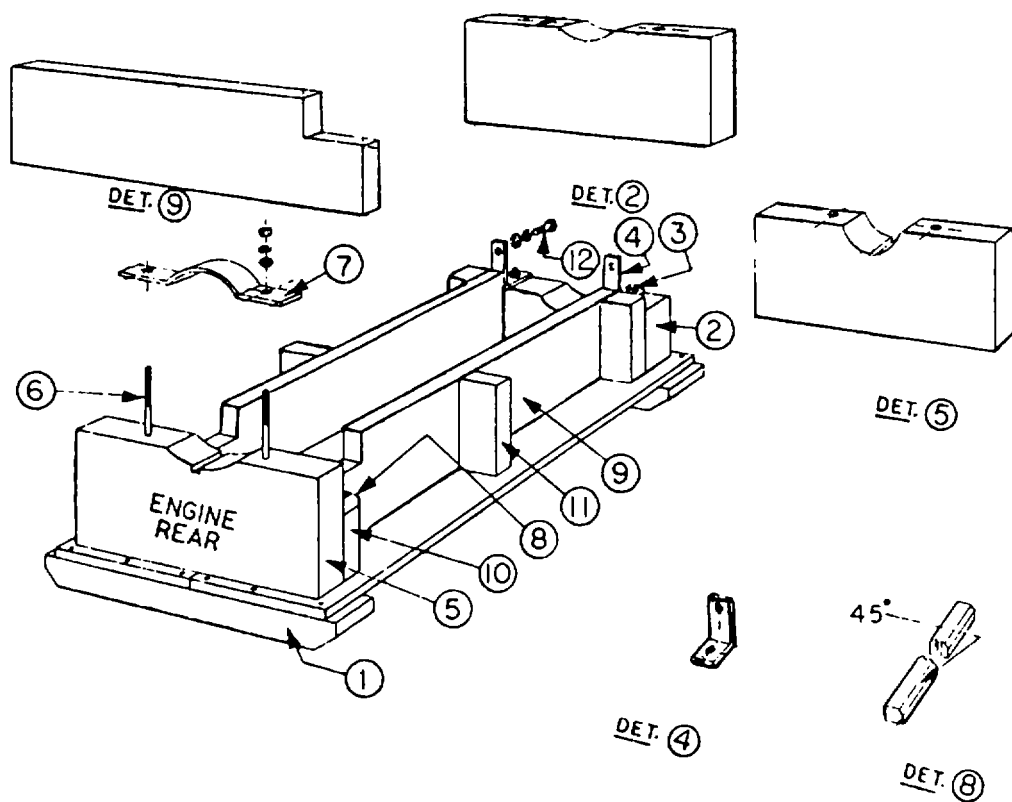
Typical Blocking, Bracing, and Anchoring Arrangements, PPP-B-621.
